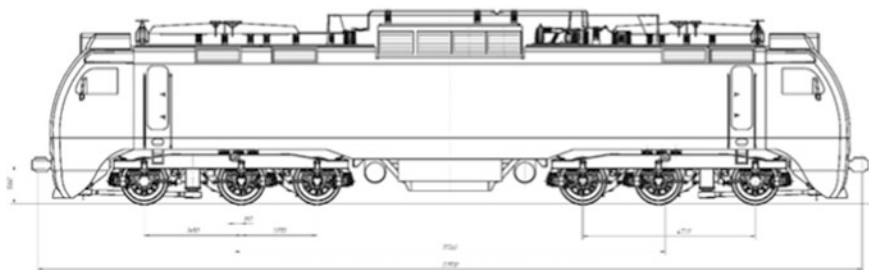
Electric locomotive on three-axle bogies (3o-3o wheel arrangement)
